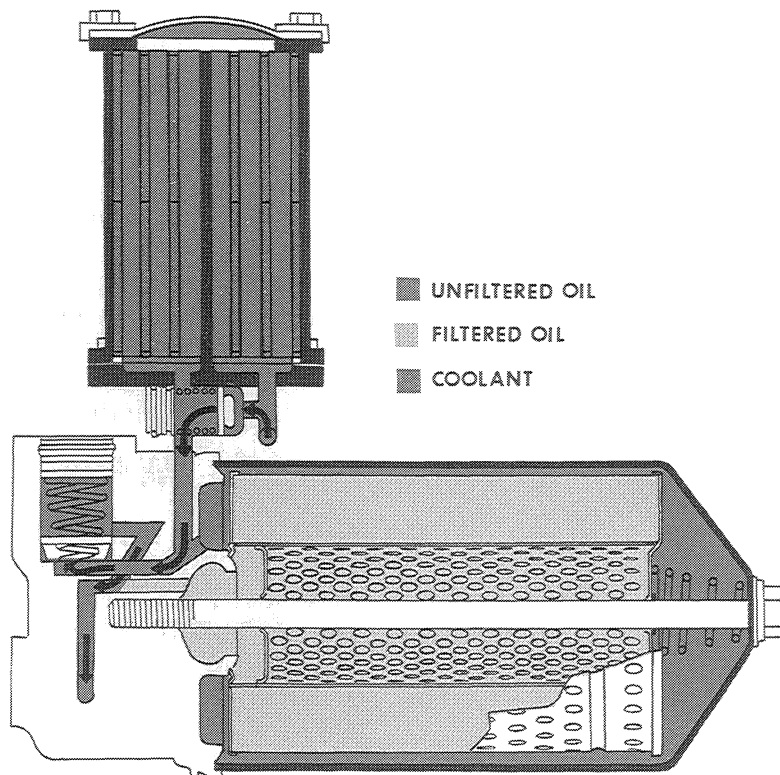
Oil Flow With Plugged Oil Cooler and Oil Filter Element
